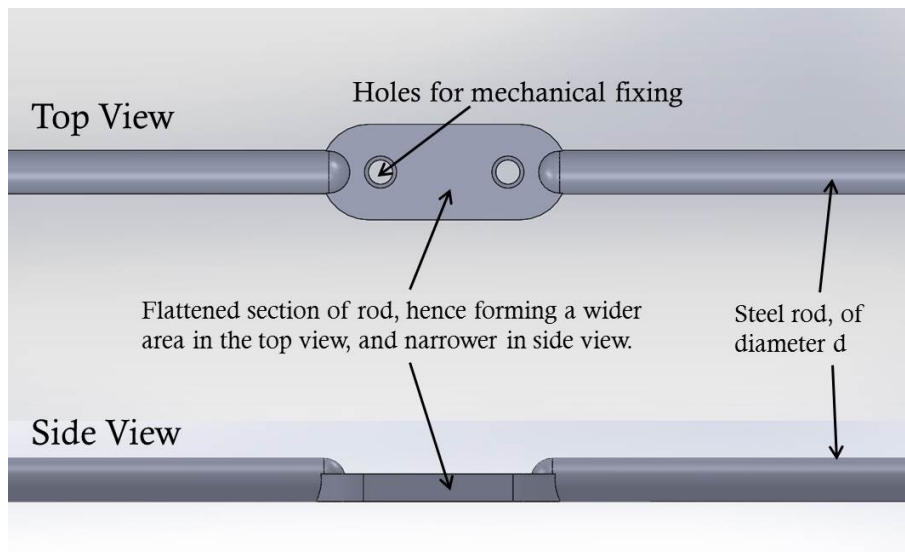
Schematic of the forming of a flattened section for mechanical attachment purposes.
